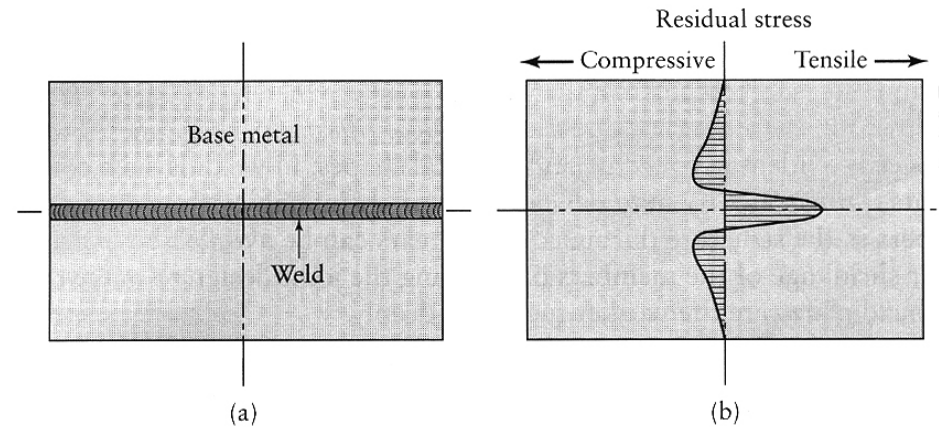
Residual stresses developed in a straight butt joint. *Source:* Courtesy of the American Welding Society.
